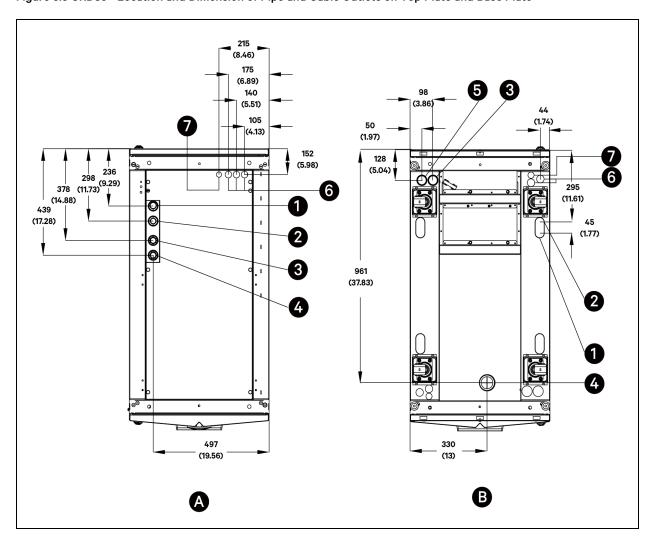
CRD35 - Location and Dimension of Pipe and Cable Outlets on Top Plate and Base Plate
